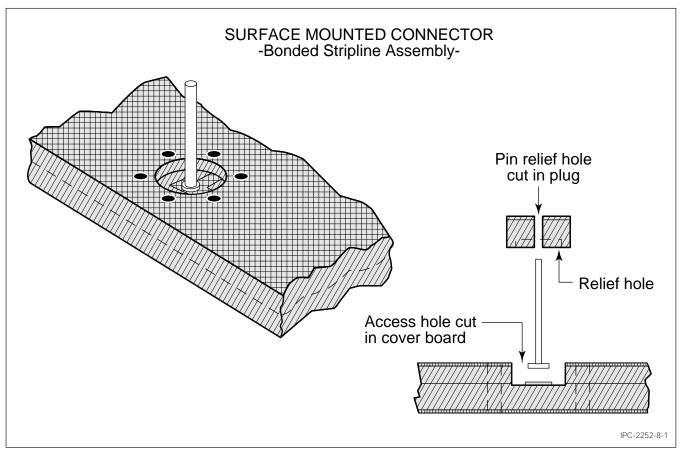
Mounting a Surface Connector to a Buried Land, Showing the Attachment of the Connector's Pin
